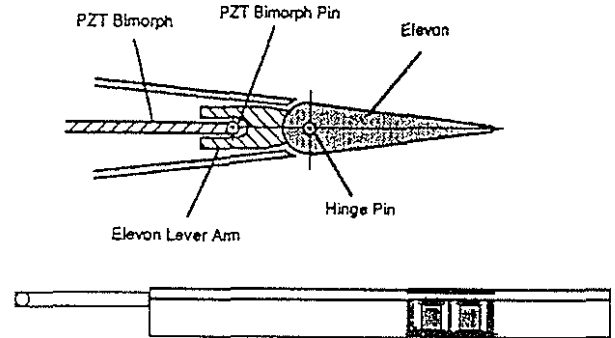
Airfoil cross section with PZT bimorph bender beam and elevon lever mechanism (top); blade planform showing fiberglass spar, active elevon section and PZT actuator layout (bottom) from [20]
